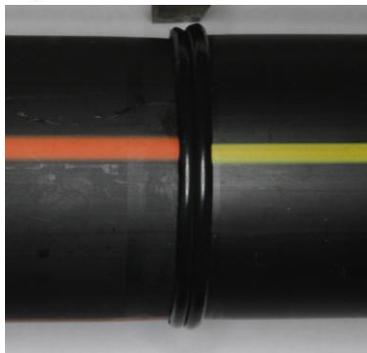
Dissimilar pipes weld (PE80 and PE-100, 63 mm diameter).
